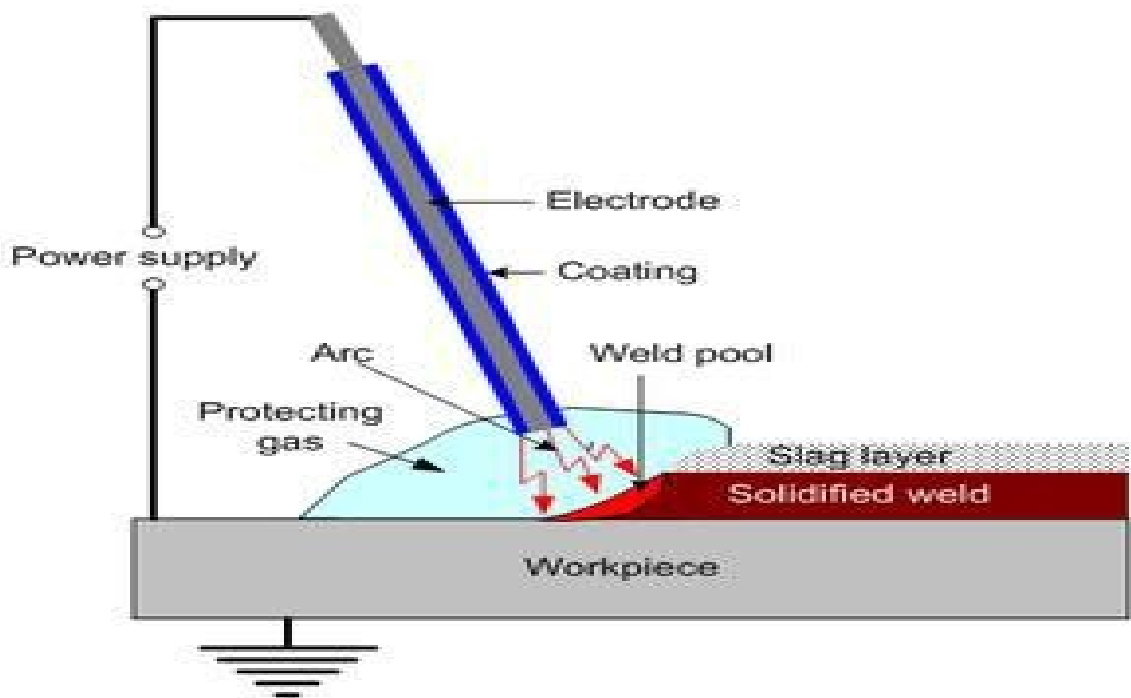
SMAW type (Courtesy www.subtech.com)
